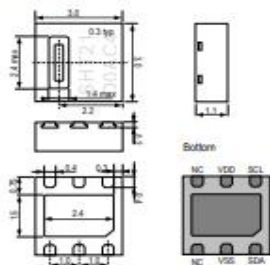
Drawing of SHT25 sensor package, dimensions are given in mm (1 mm = 0.039 inch), tolerances are ±0.1 mm. The die pad (corner pad) is internally connected to VSS. The NC pads must be left floating. VSS = GND, SDA = DATA. Numbering of I/O pads starts at lower right corner (indicated by notch in die pad) and goes clockwise (compare Table 2).
